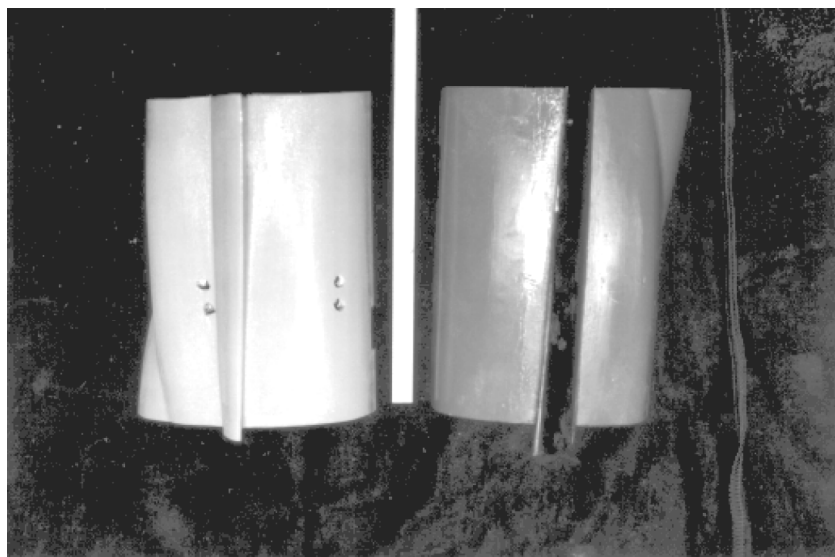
Balsa sections mounted to sheet metal frame and covered with fiberglass (top view).
